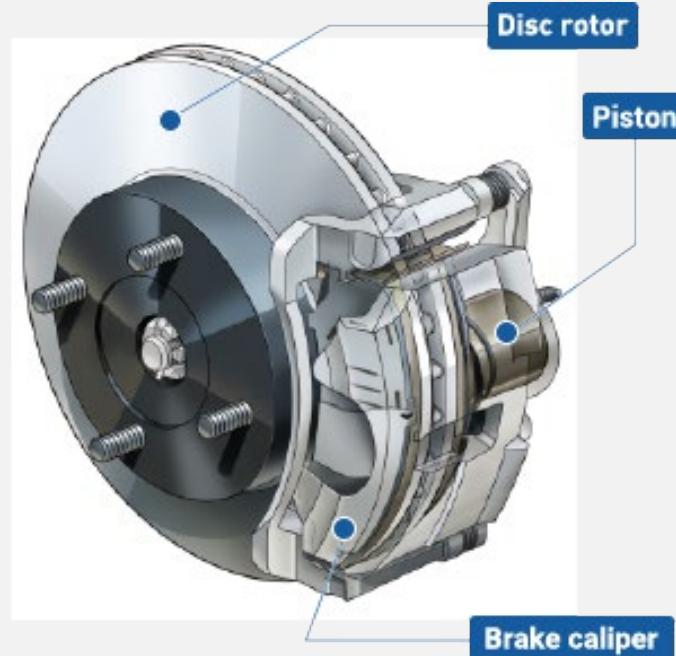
MAIN COMPONENTS OF DISC BRAKE
